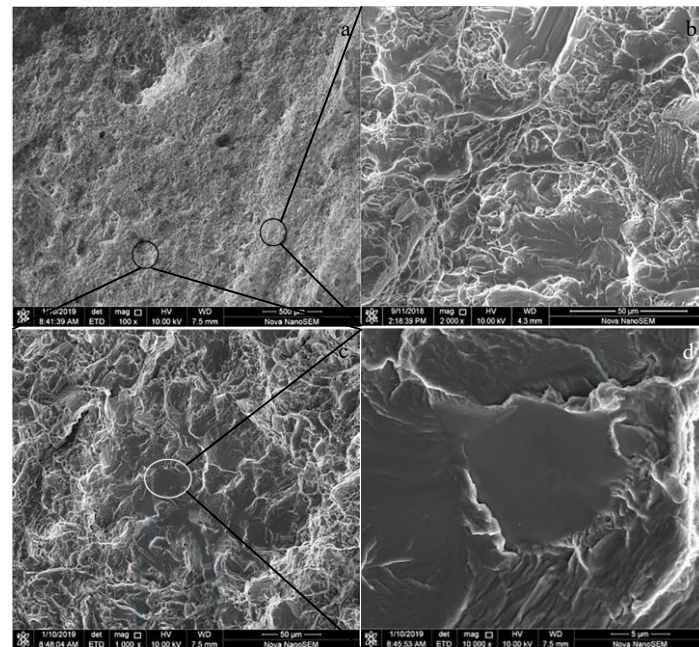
Fracture morphologies of Ti6242s alloys after dwell fatigue load of 869 MPa at room temperature: (a) overall fracture morphology; (b) transient fracture dimple; (c) internal crack initiation source+surrounding quasi-cleavage region; (d) internal crack initiation source
